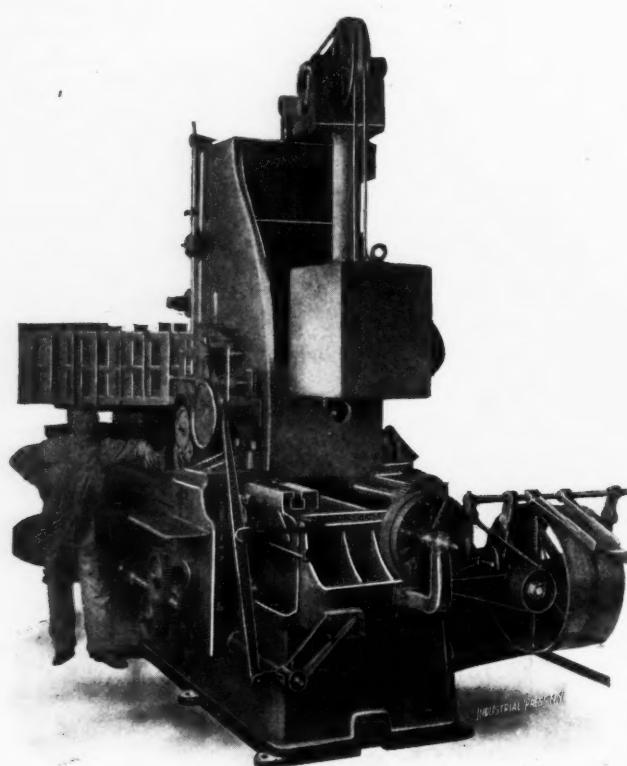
Rear View showing Counterbalance and Driving Gear.
